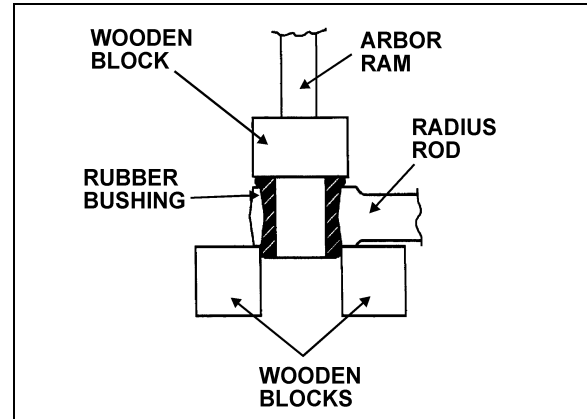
RADIUS ROD BUSHING INSTALLATION 16012
